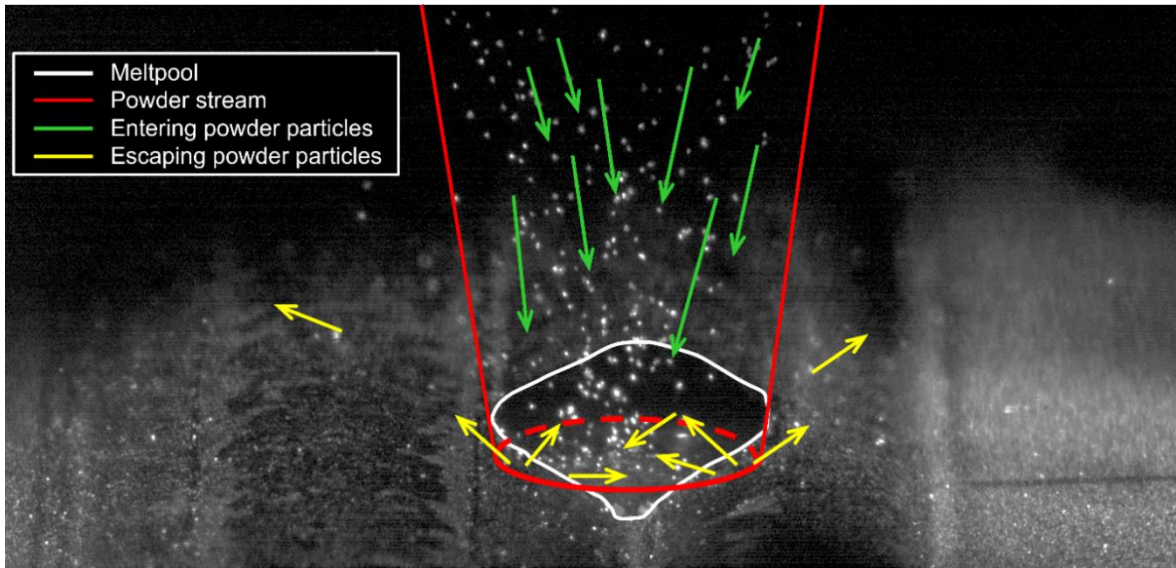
A typical view of 'ABA' cladding (in this case the inter-track spacing was 2.8mm)
